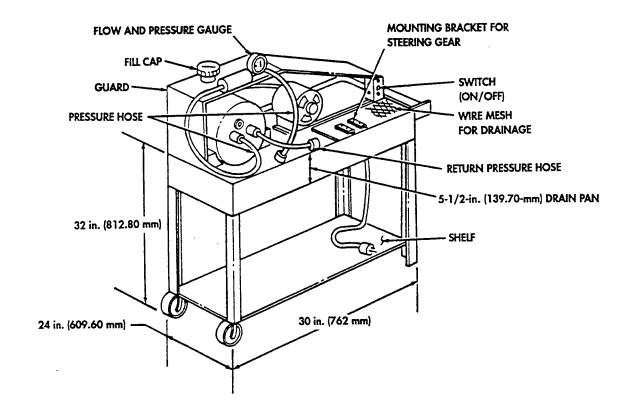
Power Steering Pump and Steering Gear Test Stand.
